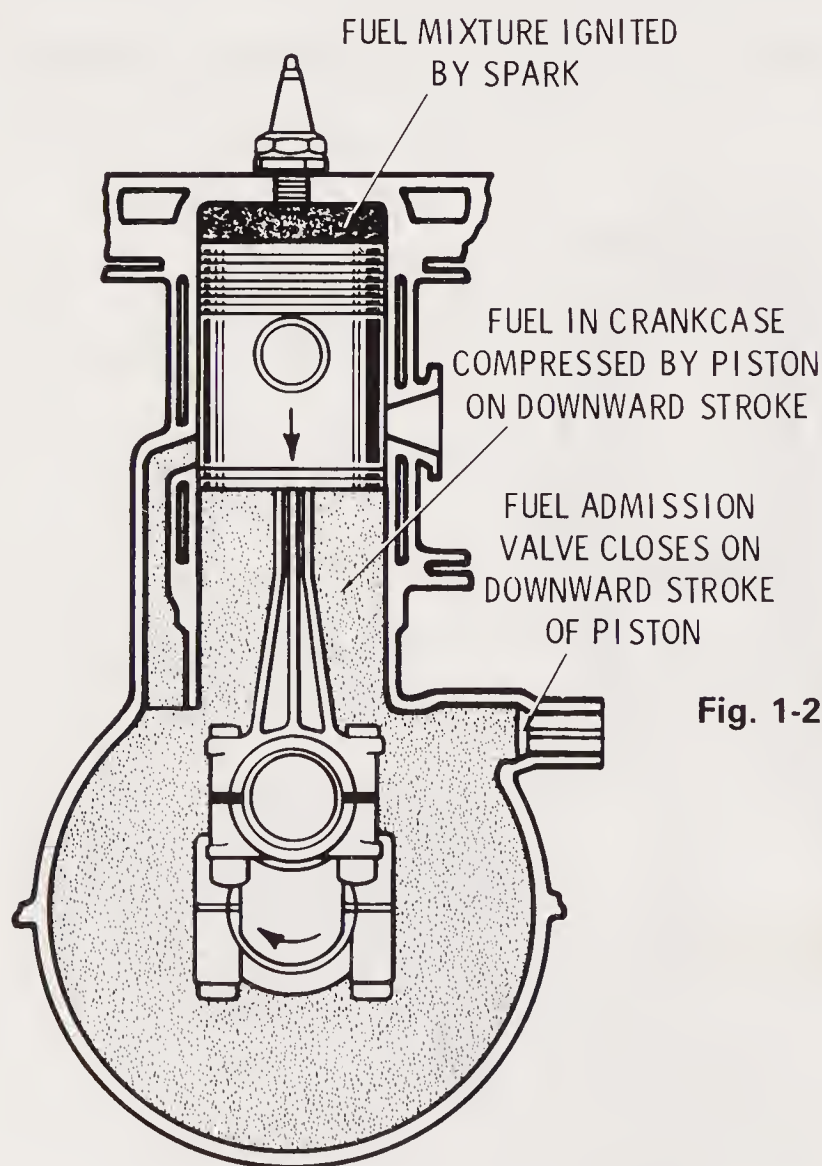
The view of a two-stroke engine with piston in the upward position.
